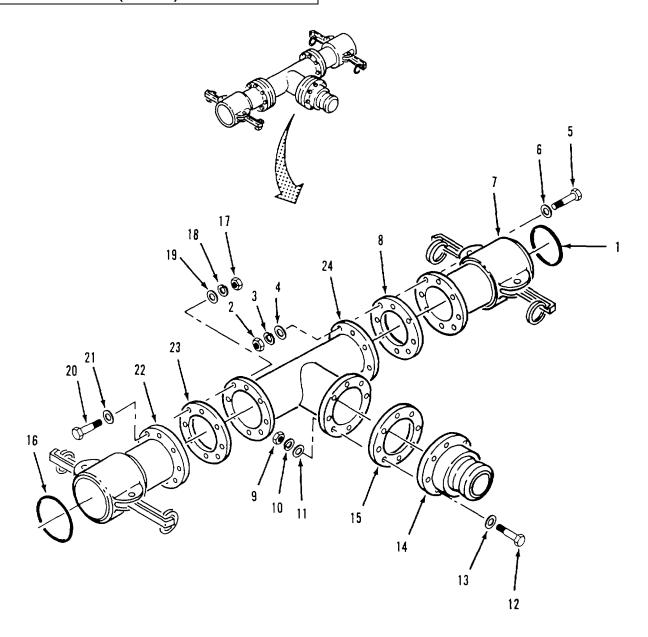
Tee Assembly (9112-Y1) Disassembly
